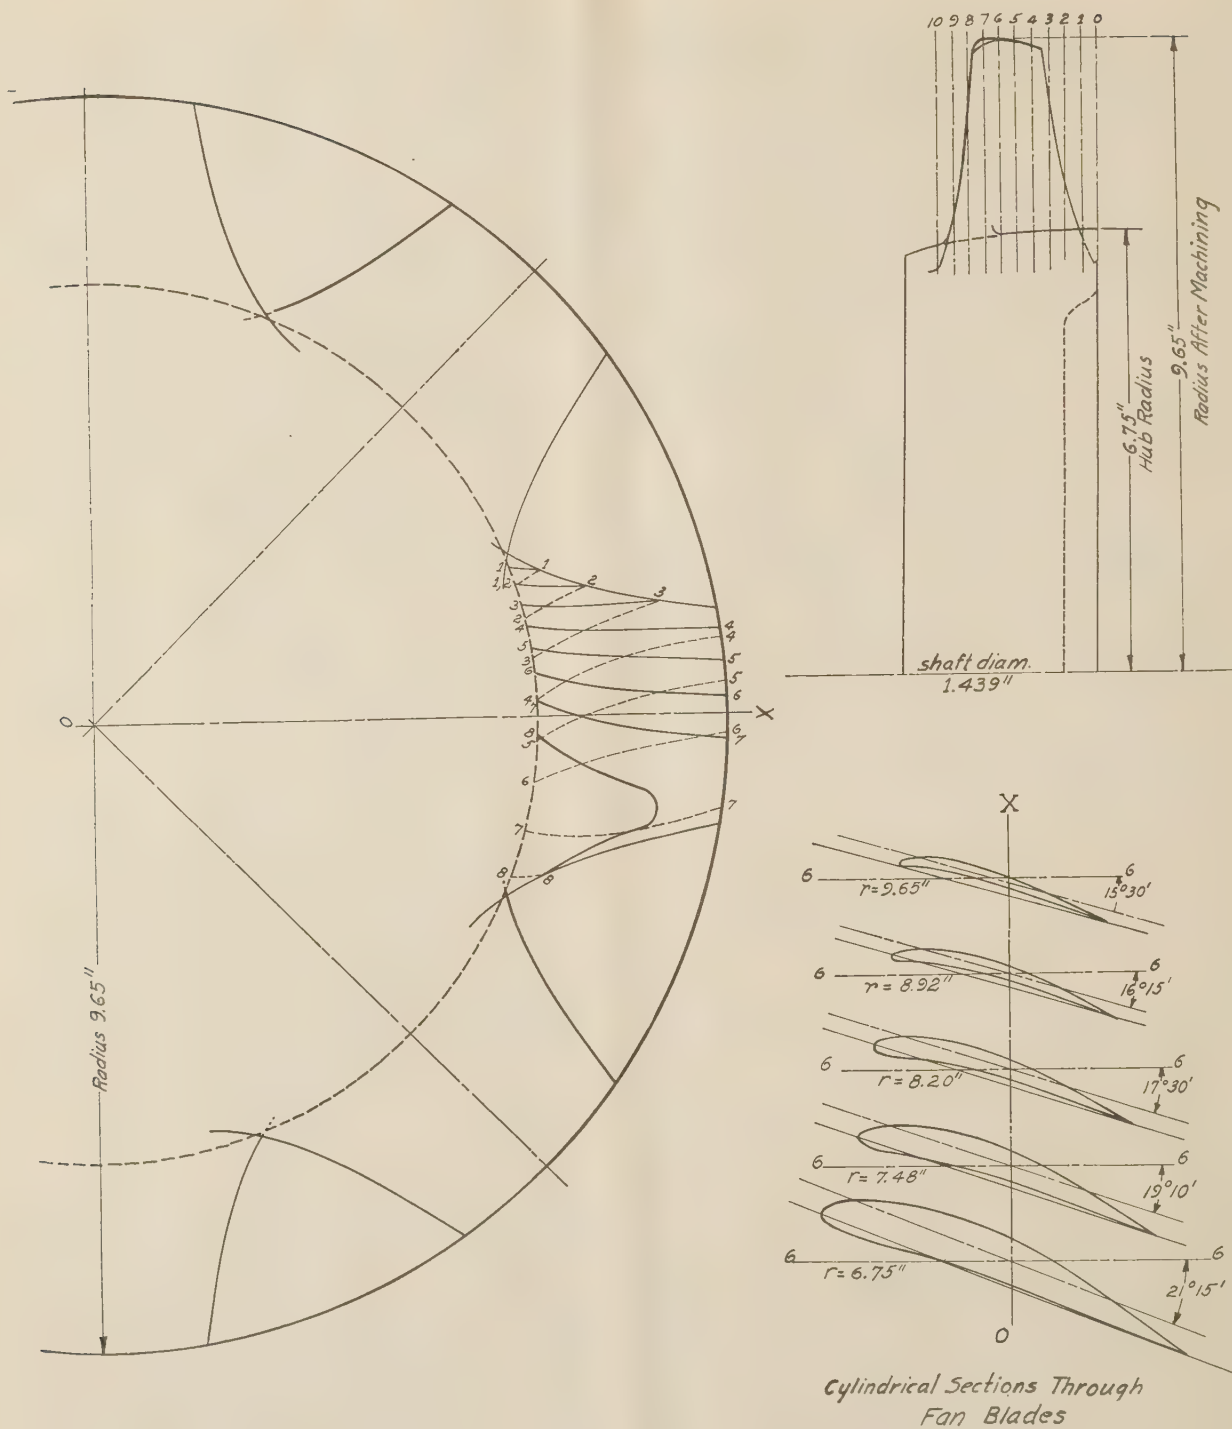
PATTERN DRAWING OF THE AXIAL-FLOW FAN TESTED
